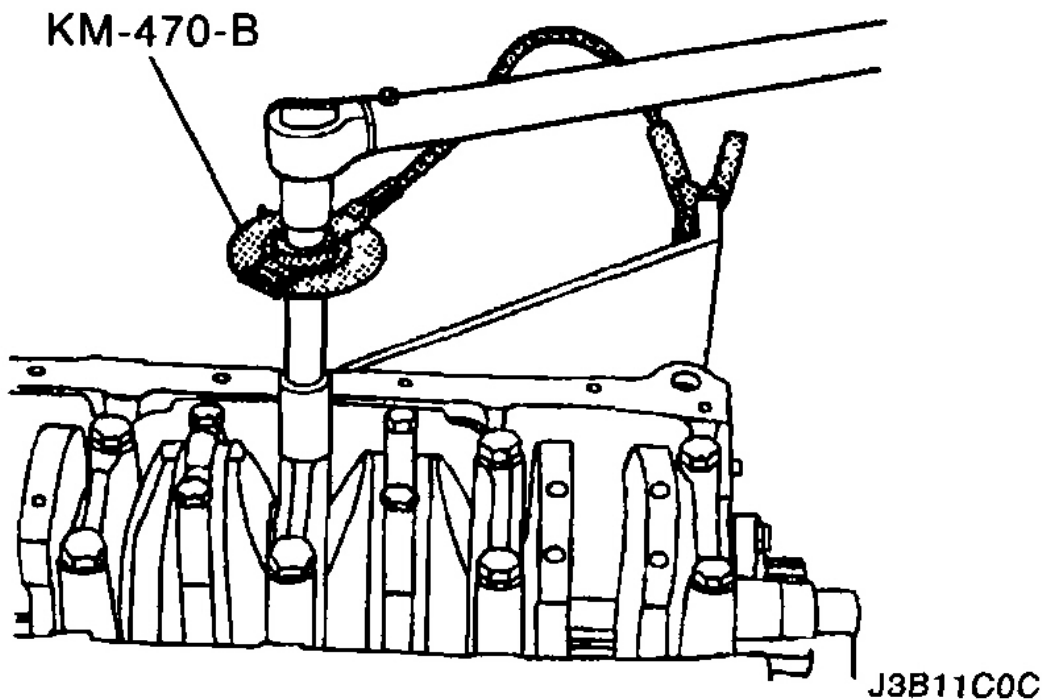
Tightening Crankshaft Bearing Caps Bolt
